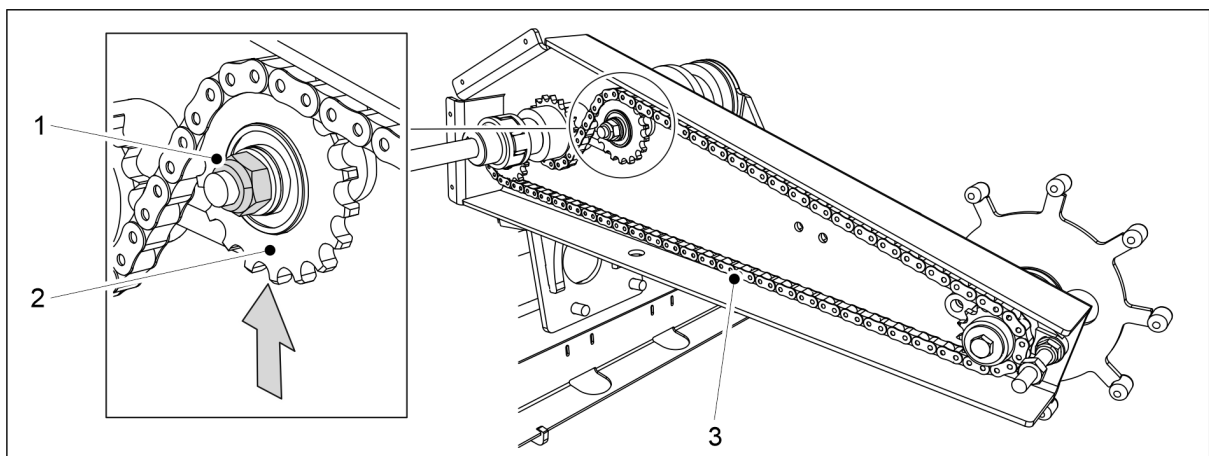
292. Tightening the wheel drive chain
